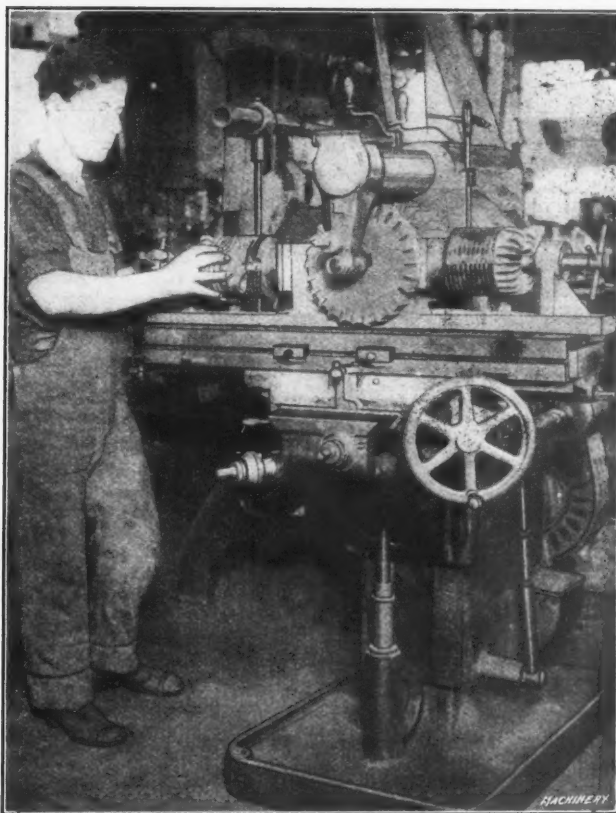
Milling the Bases of Motor Cycle Cylinder Castings on a Fixture of the Reciprocal Type
